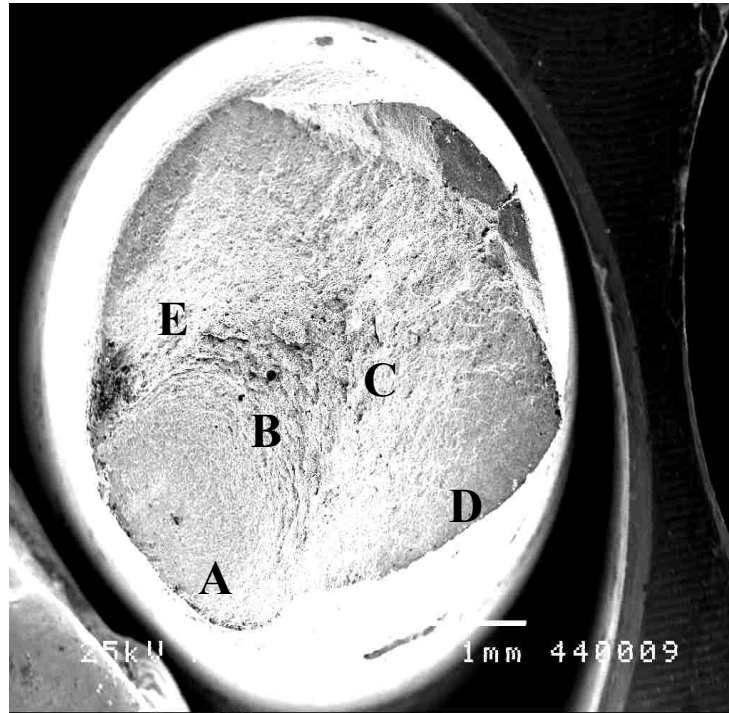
SEM photograph of the fracture face of sample C'1 near start of flat fracture showing brittle type of fracture.
